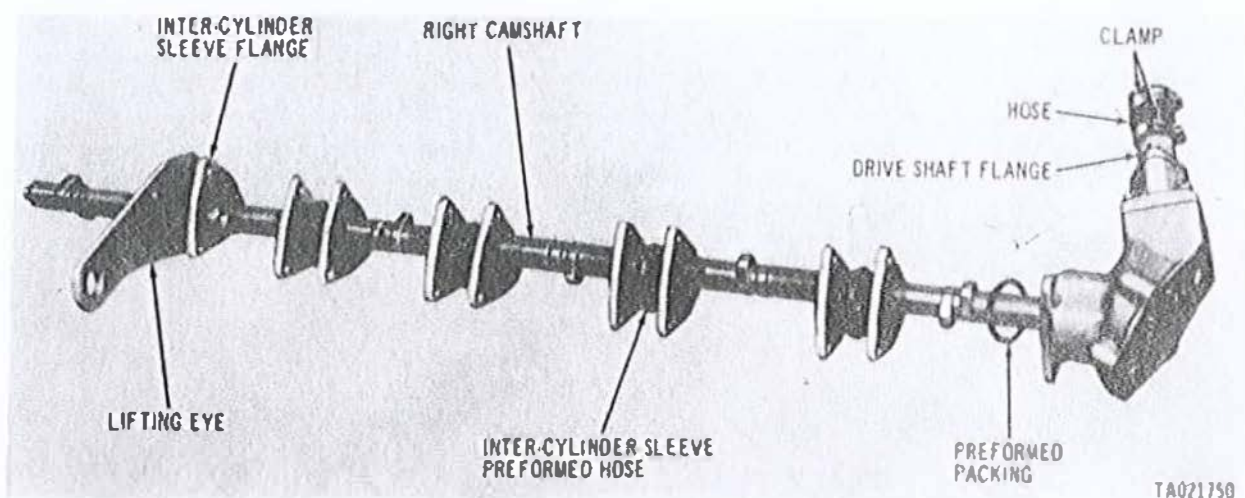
Removing or installing lifting eye, intercylinder base flanges, and hoses, model AVDS-1790-2C and AVDS-1790-2D engine.
